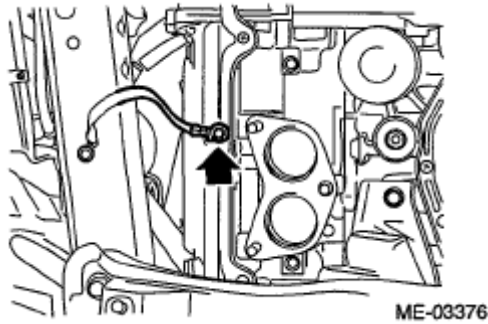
Locating Ground Cable On Engine Side (1 Of 2)
